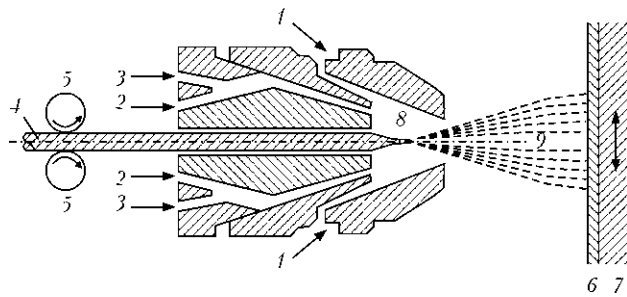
Schematic of the flame spraying torch according to DIN EN 657 [3]: 1 – compressed air; 2 – fuel gas; 3 – oxygen; 4 – wire or rod; 5 – feeding mechanism; 6 – spray coating; 7 – substrate; 8 – melted wire tip; 9 – jet of molten particles
